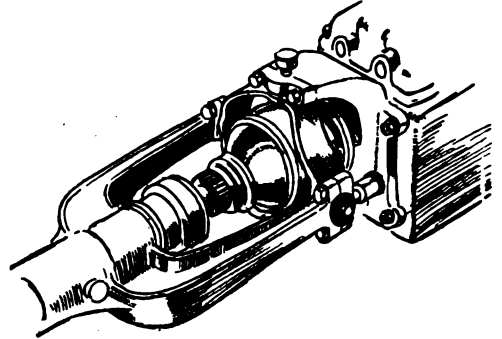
Combined torsion tube and driving strut (showing also spherical universal joint and rear end of gearbox).
